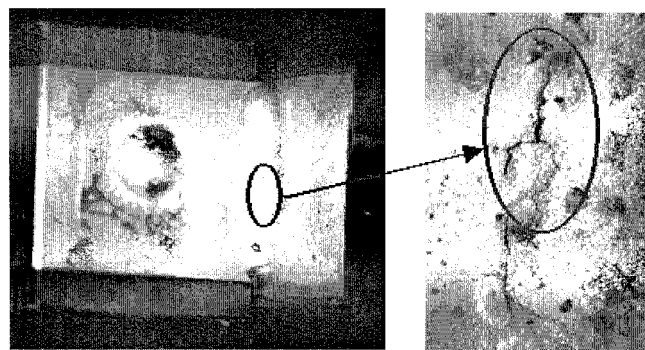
Crack at the knee of the solder joint was observed on two inductors. The figure on the left shows the crack location. The solder joint crack is visible on the surface (figure on the right).
